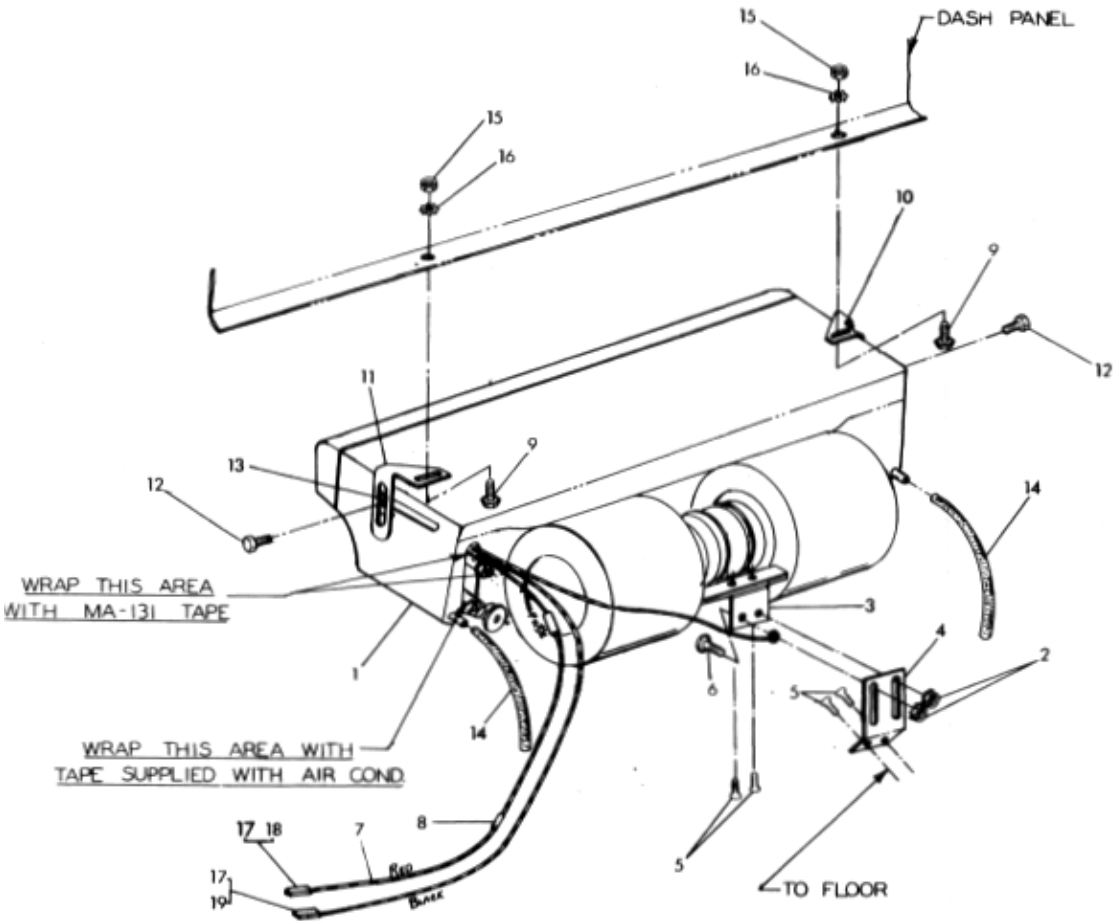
Air Conditioning Evaporator Assembly .Front. 6 & 8 Cylinder Engine
